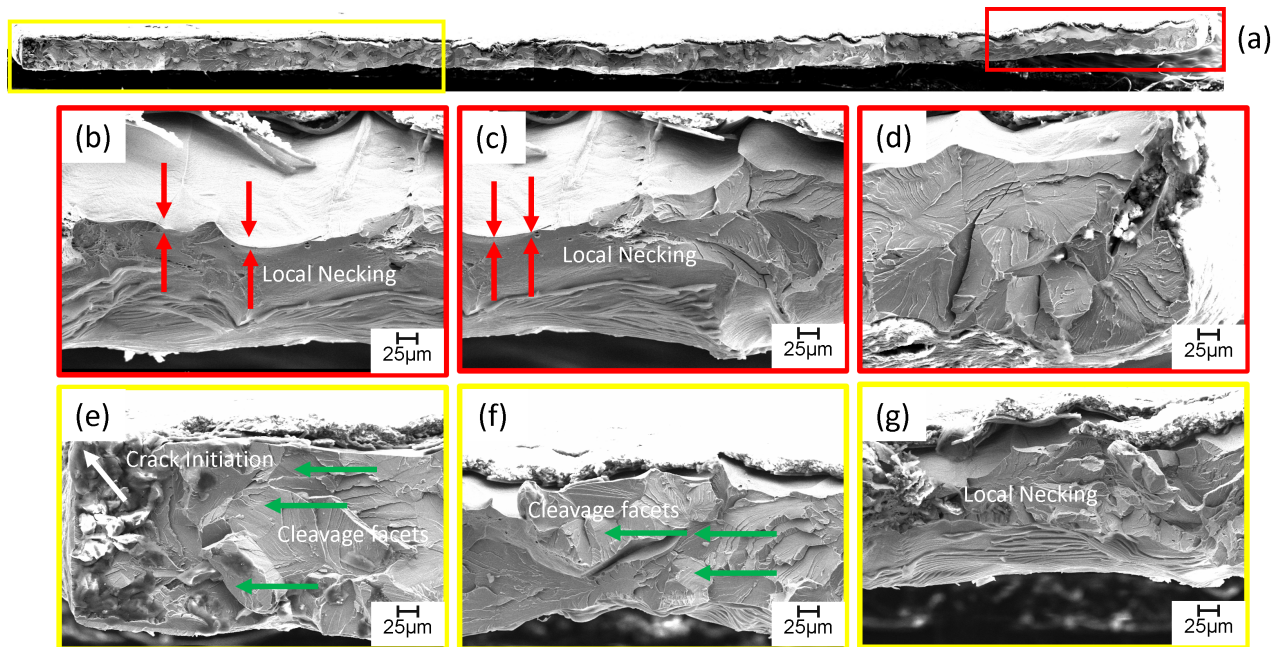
Fracture surface of room temperature quasi-static tested single sheet (a) overall view of fracture surface (b) local necking (c) local necking-transition zone (d) edge of sample (e) crack initiation zone with inter-granular cleavage facets (f) crack propagation zone with inter-granular cleavage facets (g) transition zone to local necking
